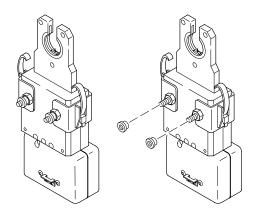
Storing the Thumb Nuts on the Adapter Screws
